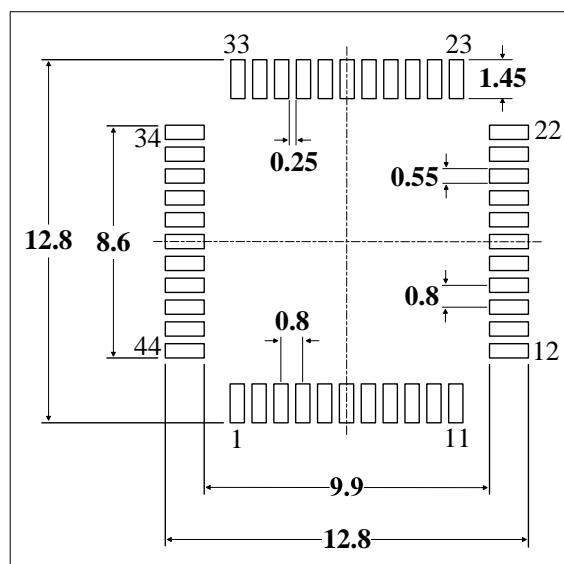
Suggestions for LQFP44(10x10mm) package solder pads⁽¹⁾
